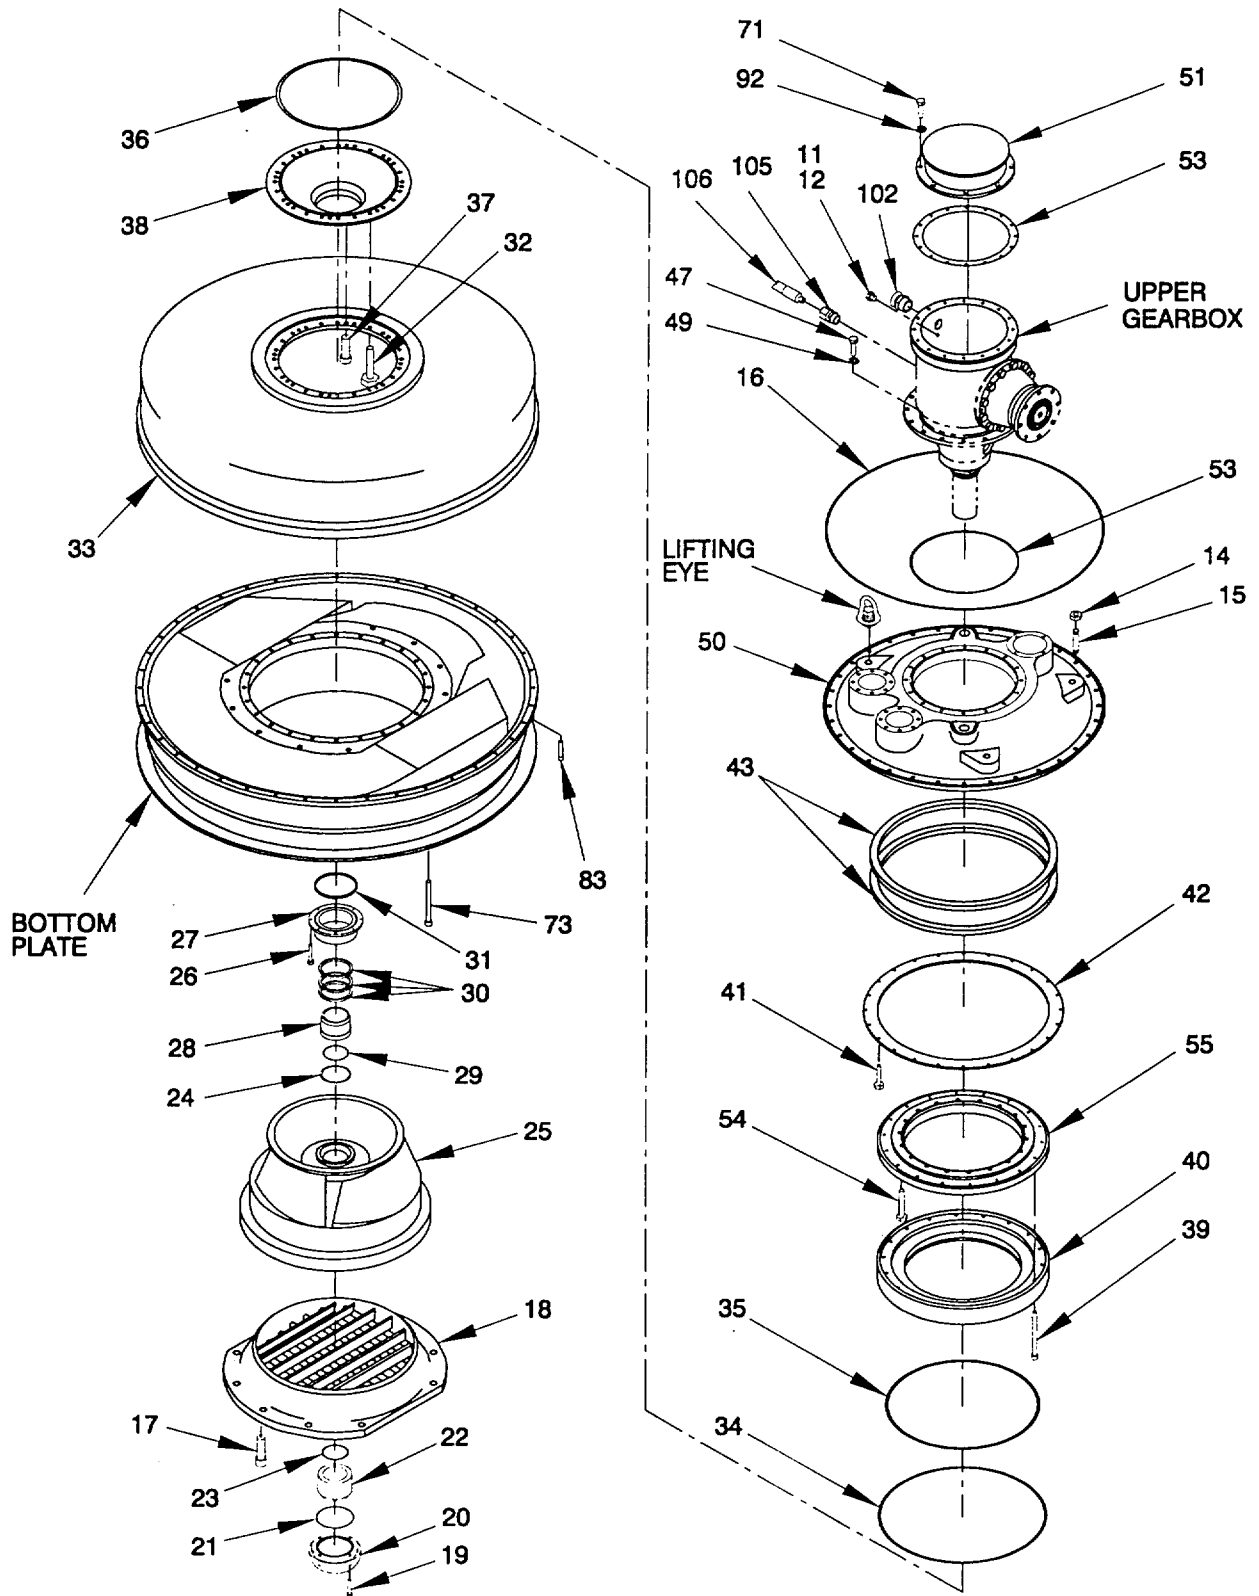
Pump-Jet, Remove, Install (Sheet 2 of 3).
